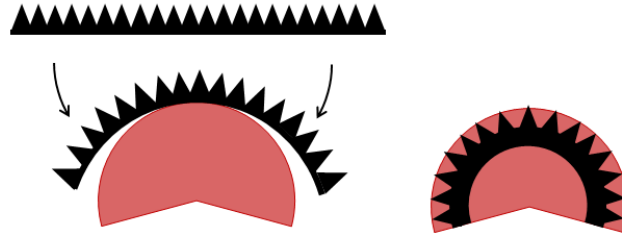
A saw-like cutter profile is wrapped around the drill head to form the cutting face of the drill.
